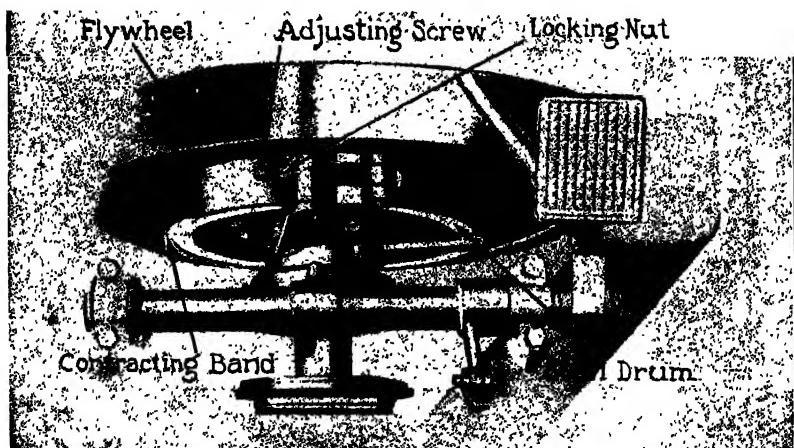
External Constricting Band Clutch of Haynes Design.
